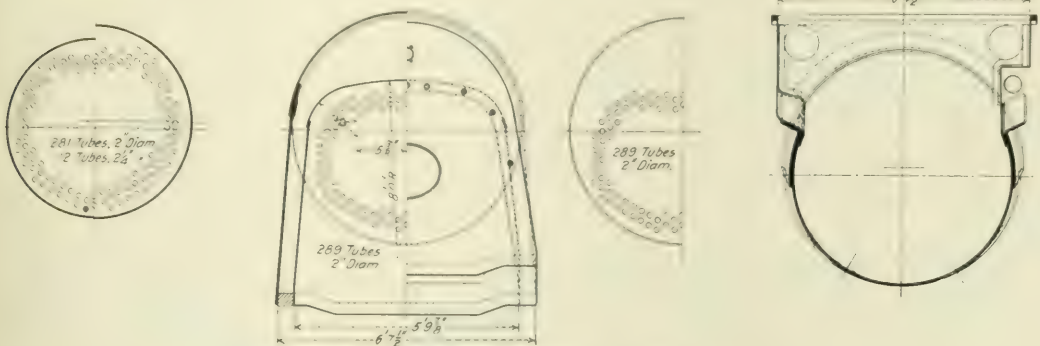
A—Cross-Section Through Boiler for Mallet Locomotive.
